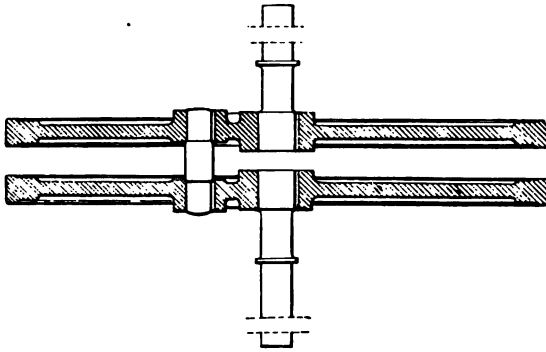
“Express” Engine: Double Fly-wheel and Shaft. Scale 1/20th.
